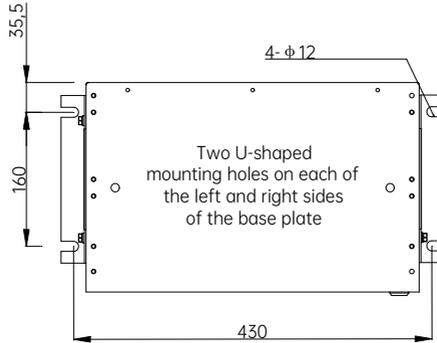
Positions and dimensions of base plate installation holes (unit: mm)
